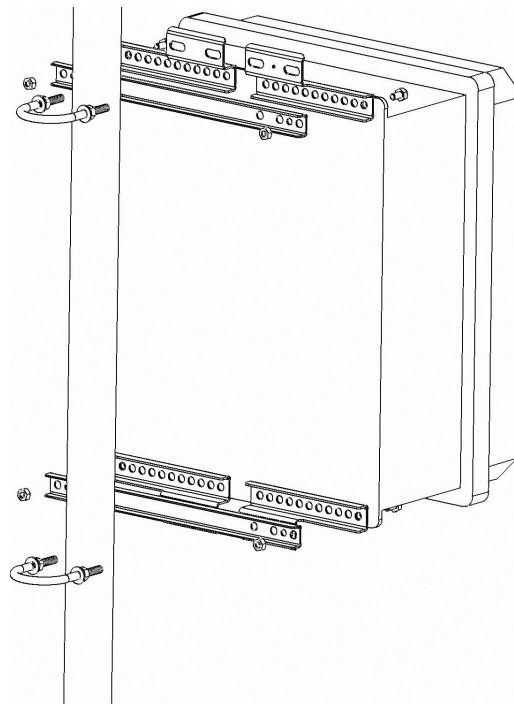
This exploded view shows the components of a “-MM” bracket
